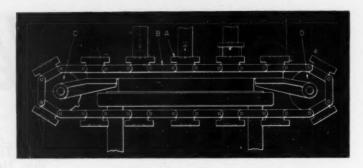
Shuttle type fixture which permits a drilling and a tapping operation to be performed consecutively
